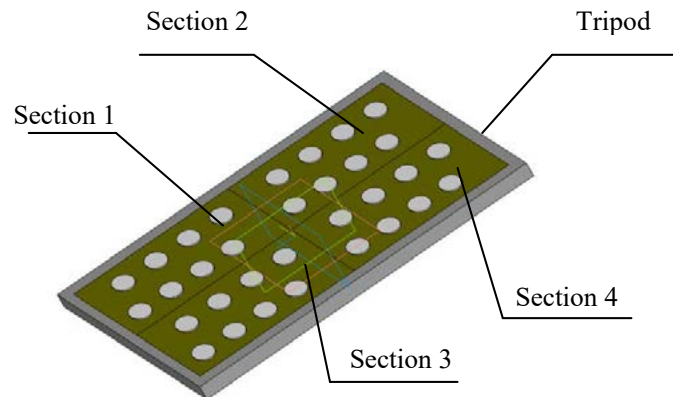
Four-Section Phased Antenna Array Assembly Installed in the Mounting Stand
